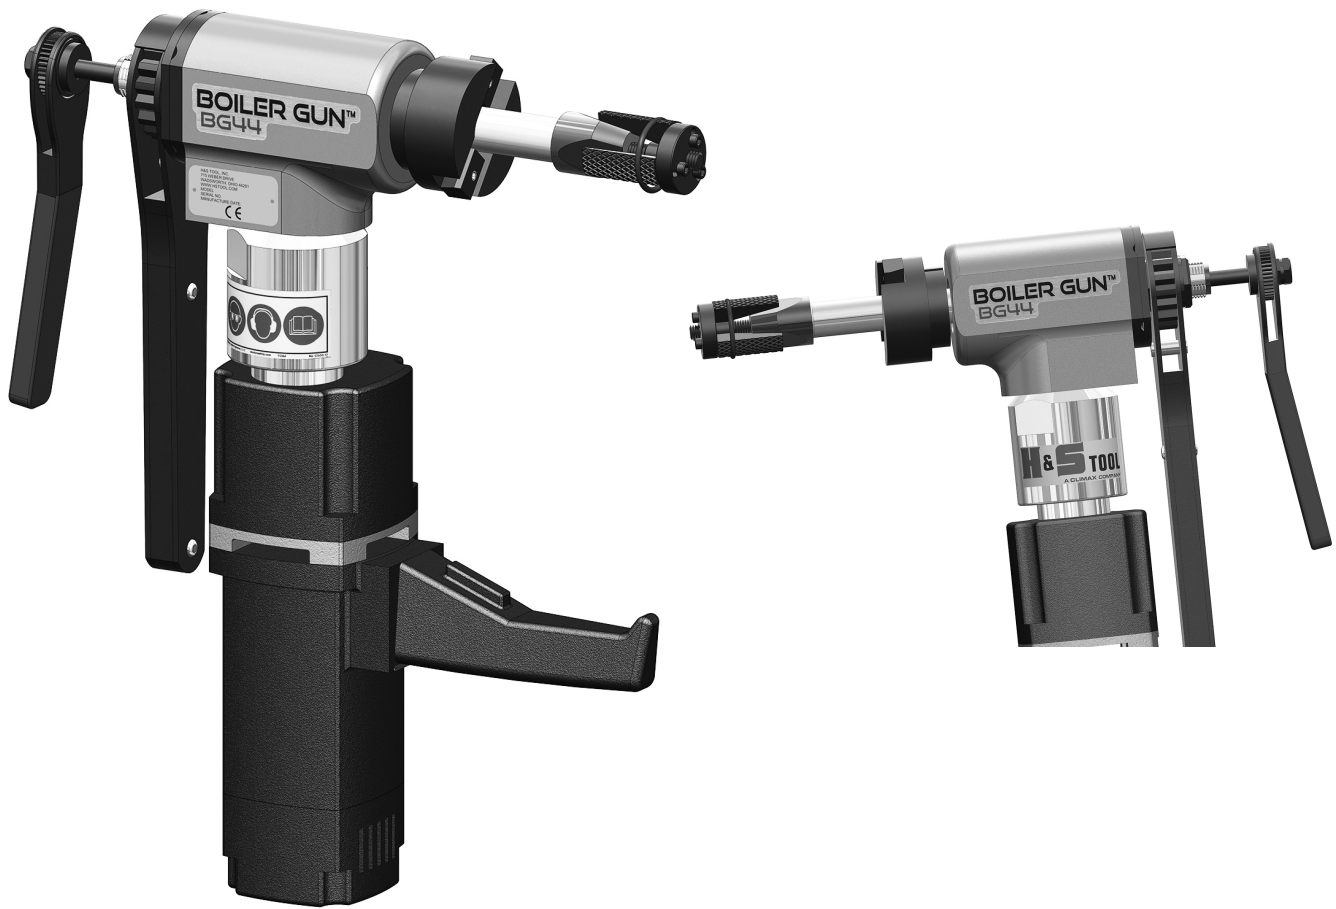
BG44 BOILER GUN- WRENCH FEED, ELECTRIC LABEL LOCATION
